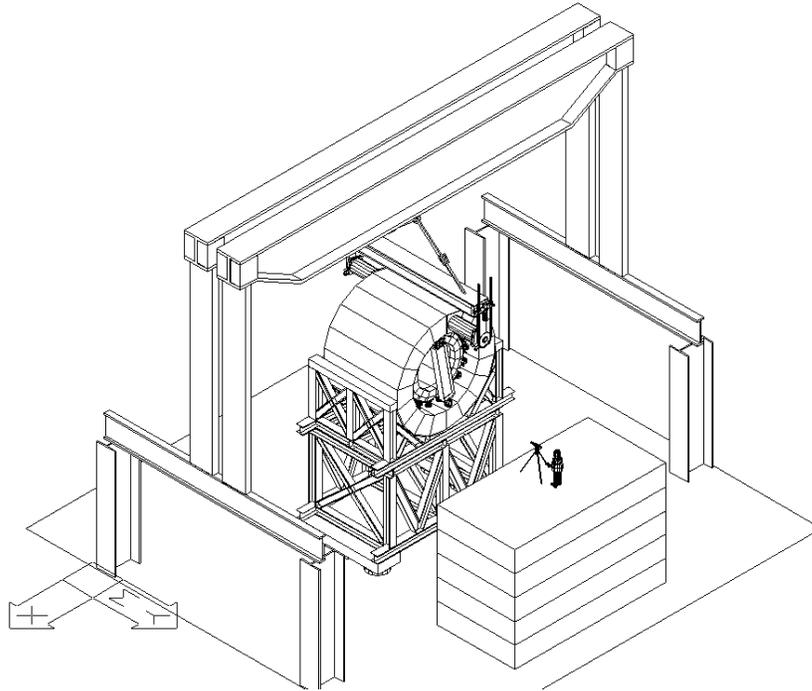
CMS HCAL barrel assembly / installation step 8.
